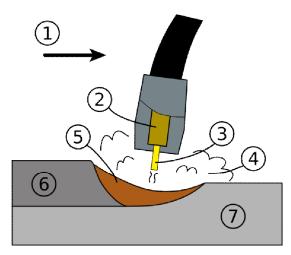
GMAW weld area. (1) Direction of travel, (2) Contact tube,(3) Electrode, (4) Shielding gas, (5) Molten weld metal,(6) Solidified weld metal, (7) Work piece.
